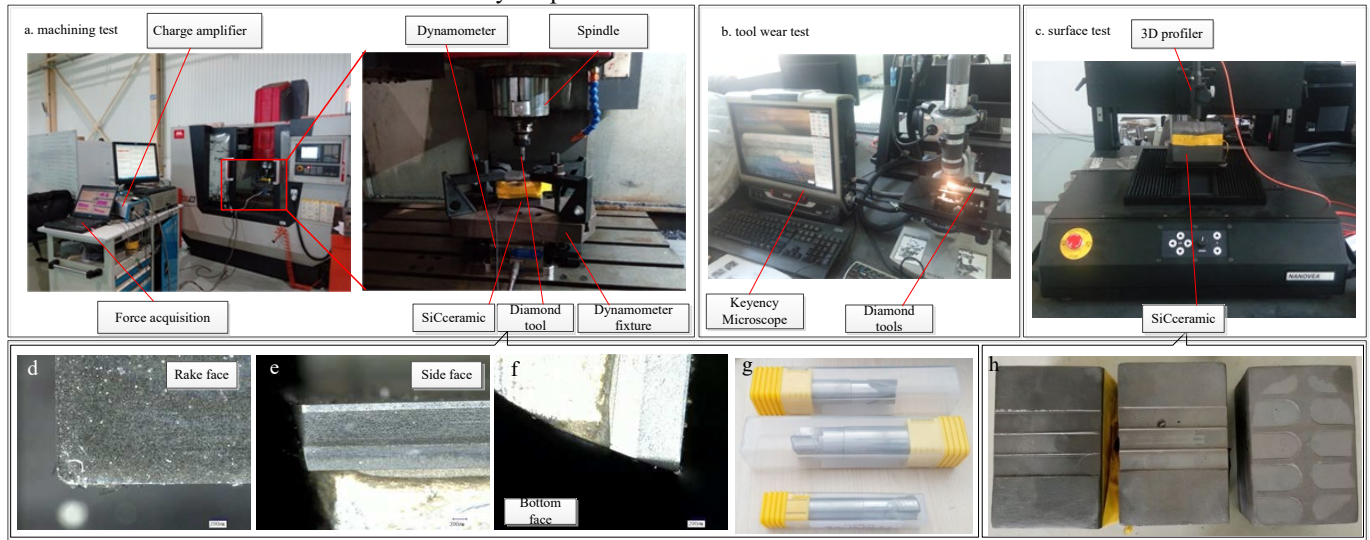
Test of SiC Ceramics milling (a. machining test; b. tool wear test; c. surface tests; def. rake, side, and bottom faces of new tool; g. diamond tool; h. SiC workpiece)
